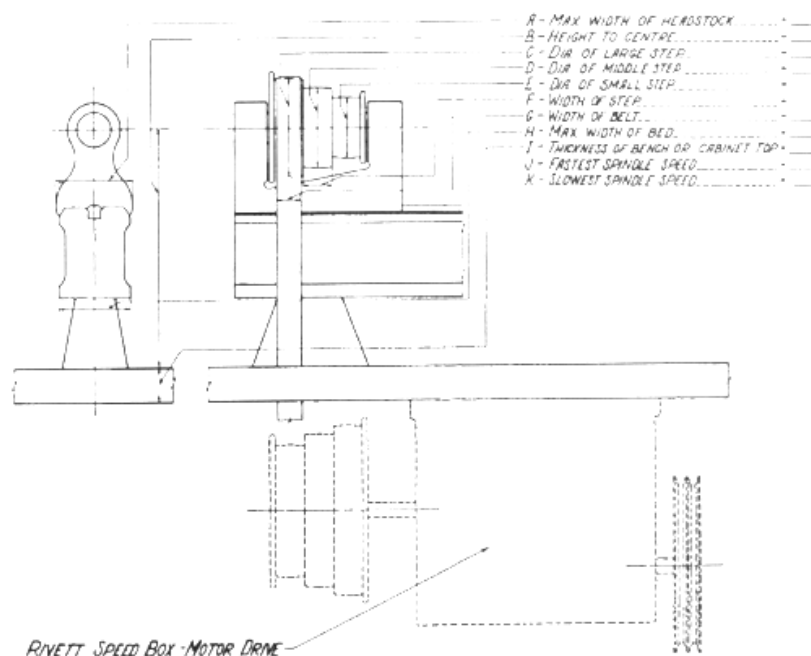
Diagram — Dimensions required to apply Rivett Speed Box Motor Drive to lathes
